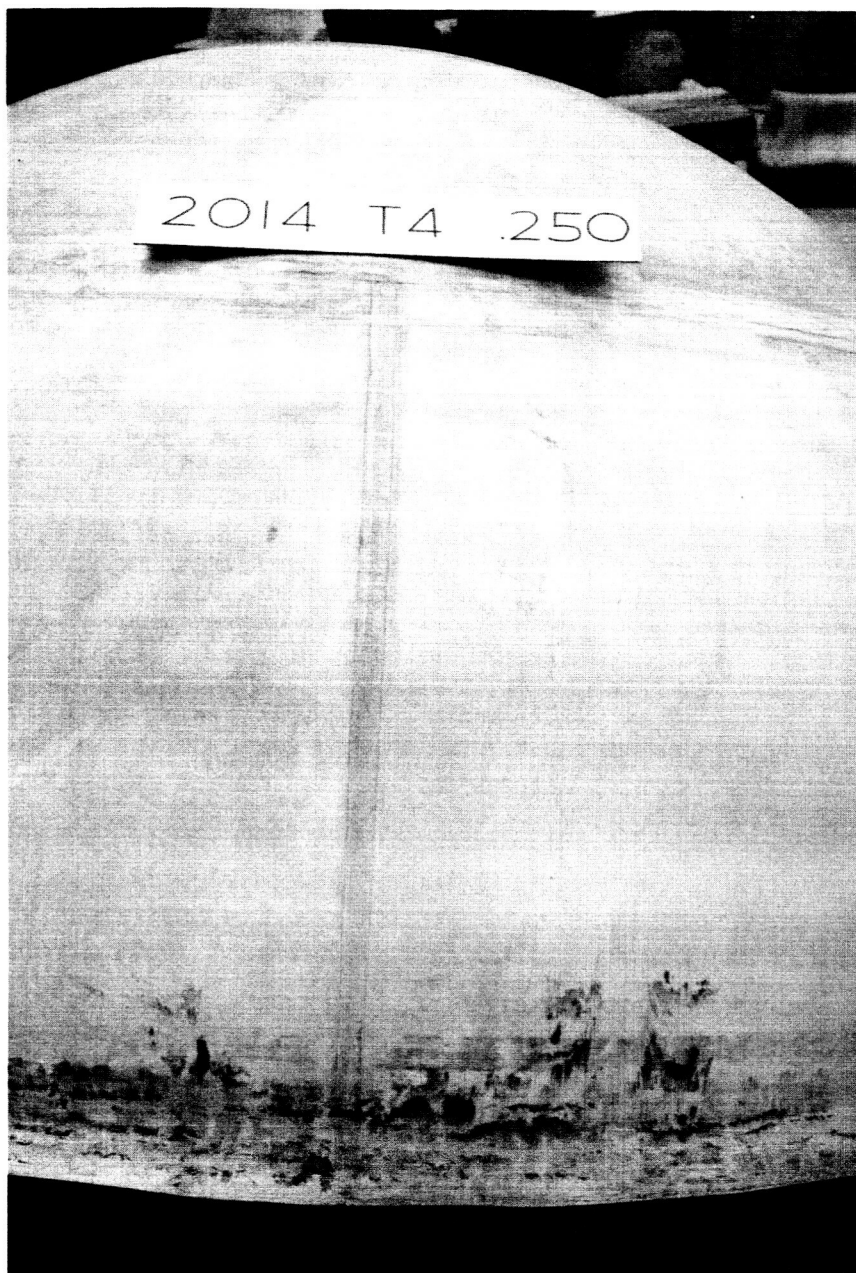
Figure VII Bulkhead No. 1 - Opposite Side of Figure VI, Showing Sound Longitudinal Weld
